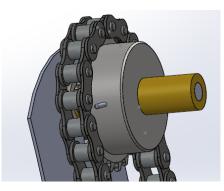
The spring pin is used to constrain the rotation of the shaft with the sprocket.
